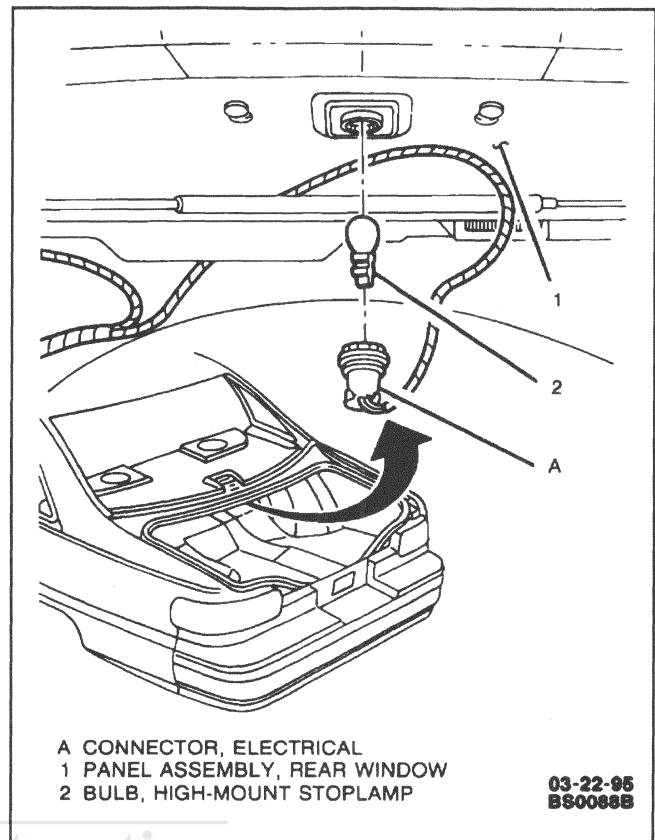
High-Mount Stoplamp-(Chevrolet Sedan)
